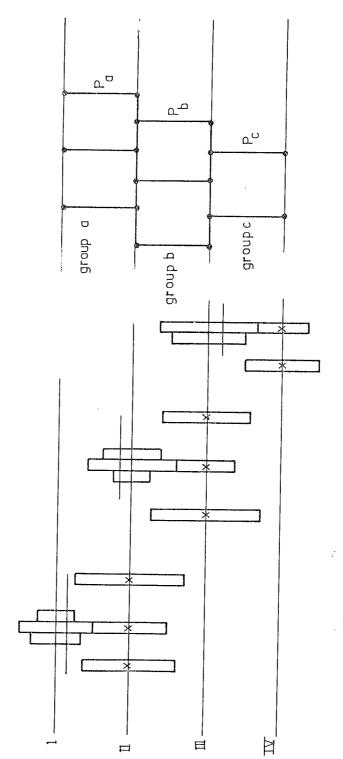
Arrangement of Gears of an 18 Speed 4 Shaft Gearbox
